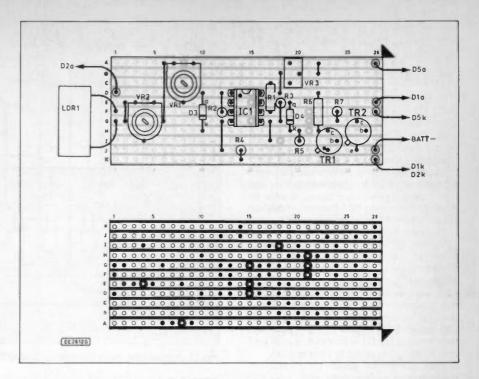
Circuit board component layout and details for breaks required in the underside copper tracks.
